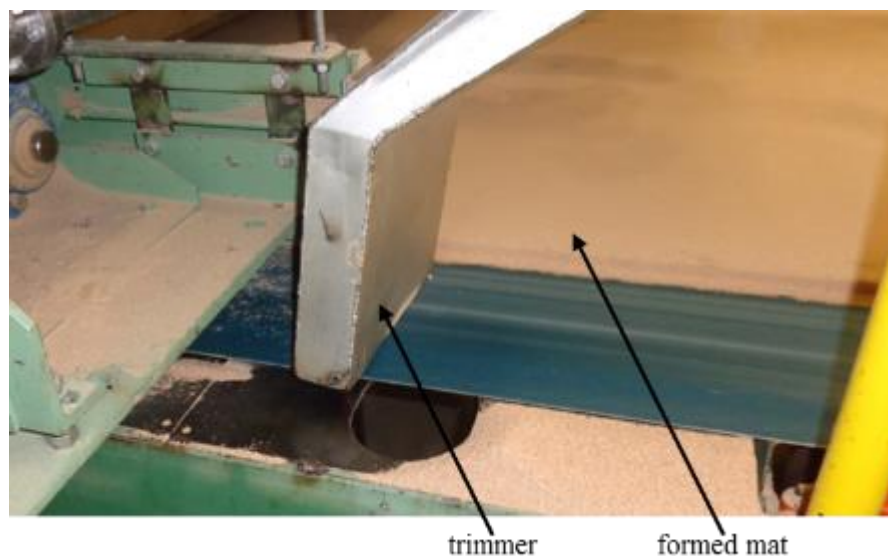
Trimming of mat edge on caul-less forming line. Source: Sam-Brew 2016.
